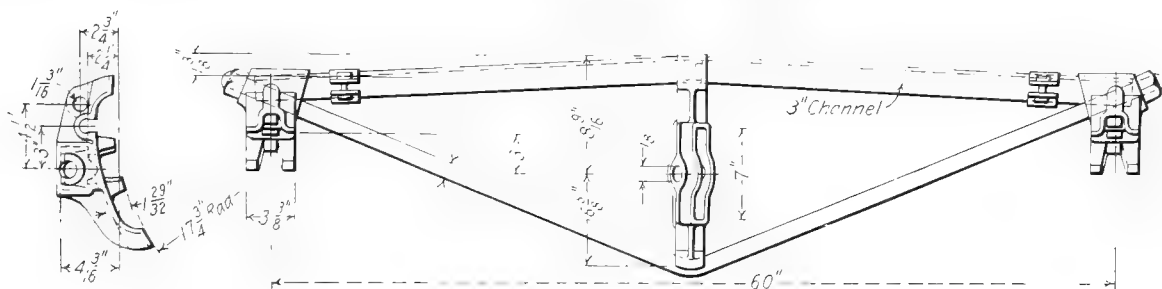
No. 2 Buffalo Brake Beam. Buffalo Brake Beam Company.
